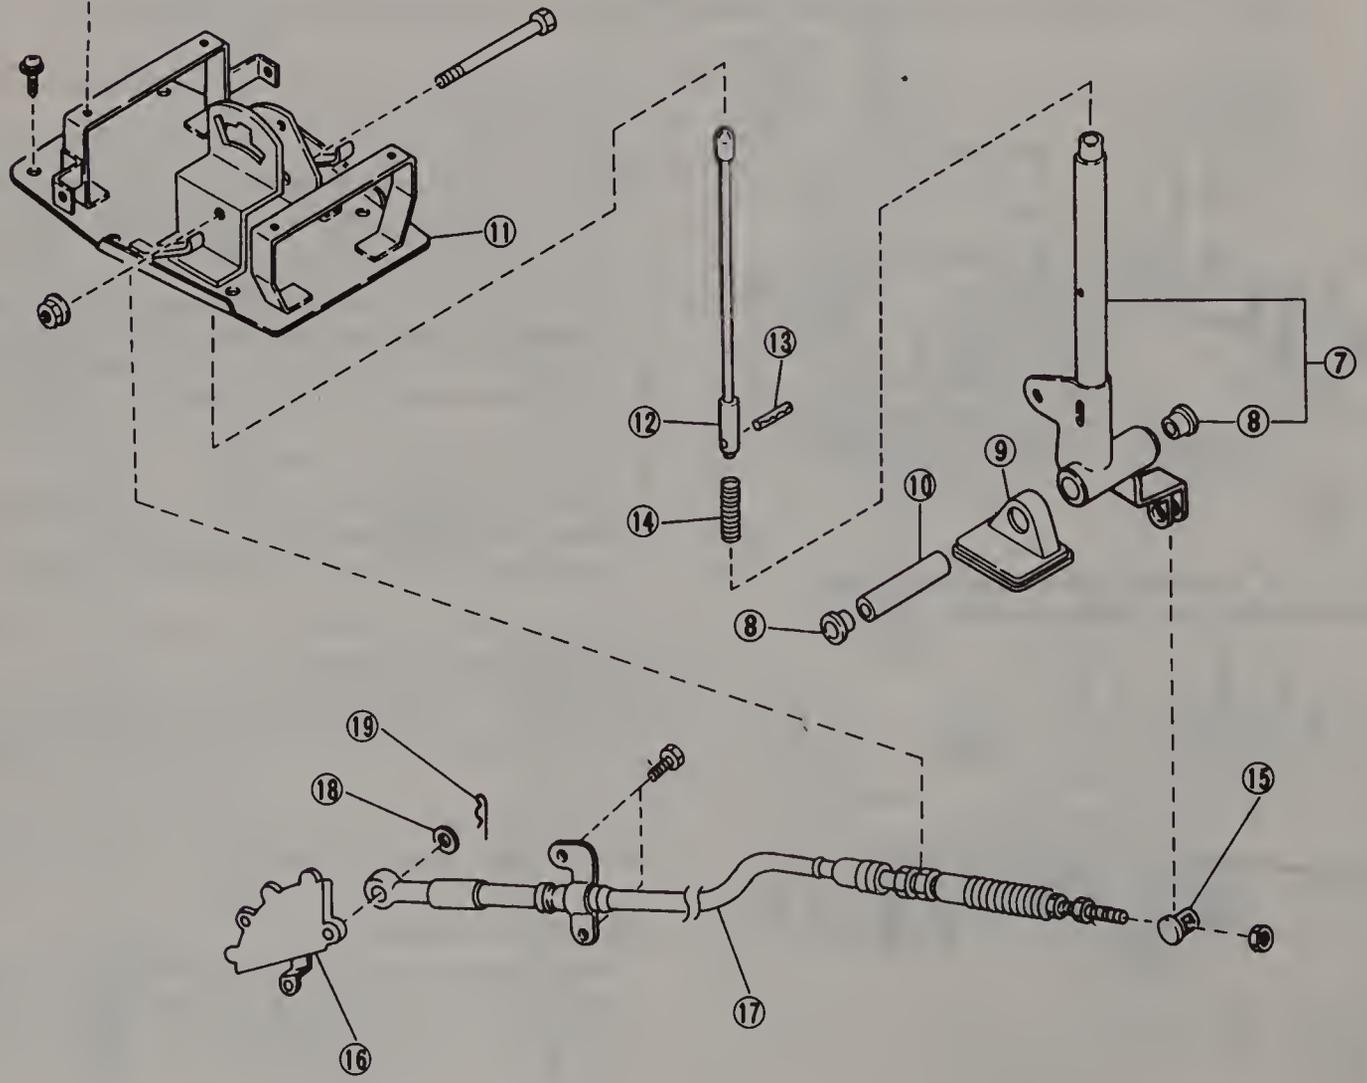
Shifter components — exploded view (4-speed automatic) (Sec 11)
